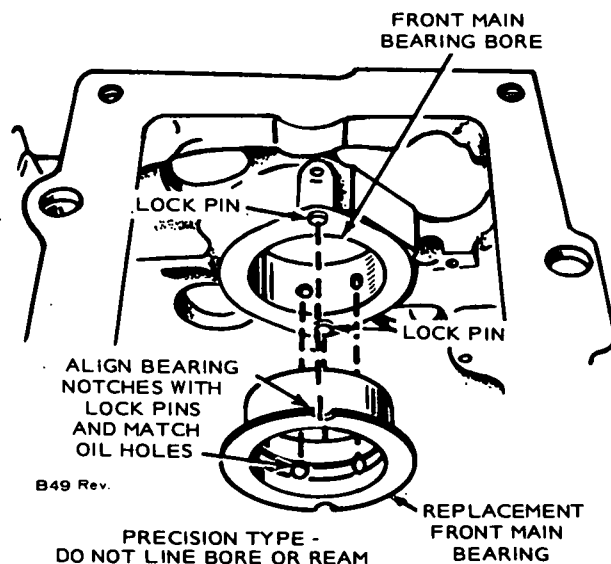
FRONT MAIN BEARING INSTALLATION
